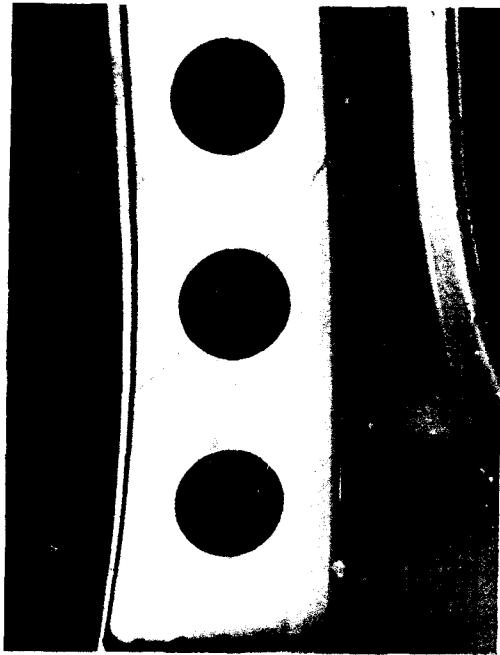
View of lightening hole failure No. 1 showing crack trajectories in web.
